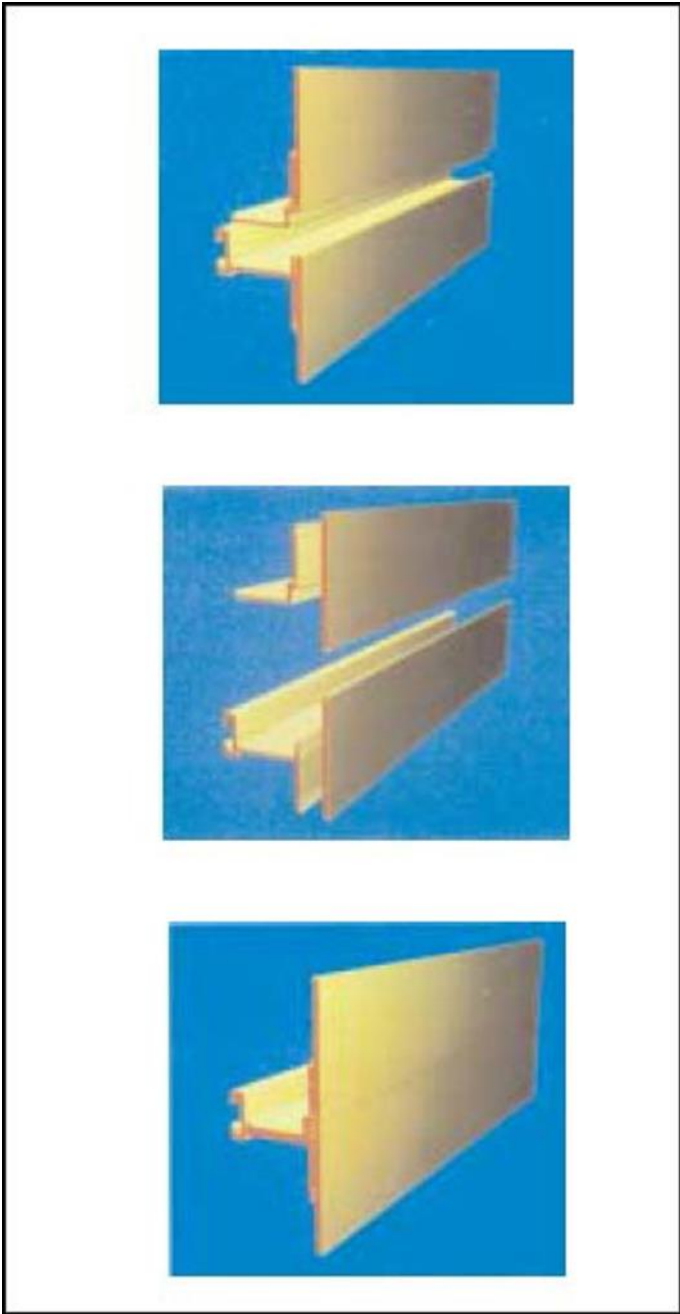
(b) illustrates the two-section dovetail construction. The advantages of this system are
